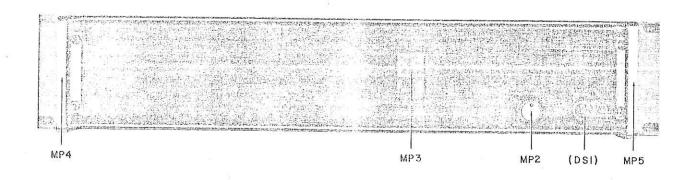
Type MTF-102A Microwave Tuning Frame, Front View, Location of Components.
